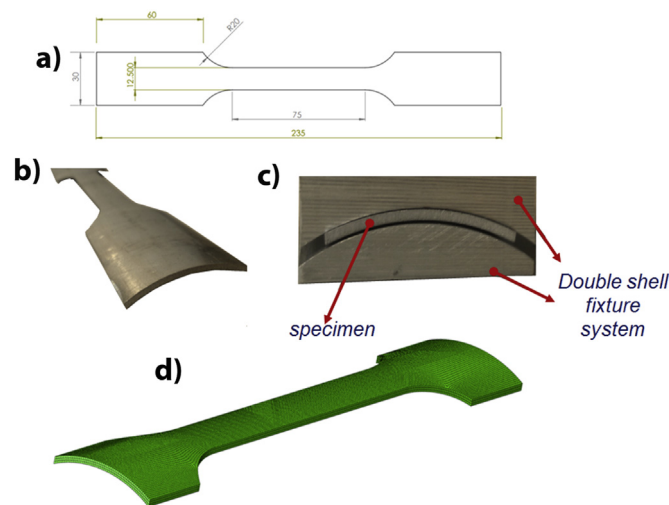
a) Technical drawing of the specimen cut from the tube b) view of the specimen c) details of the fixture system d) numerical model.
